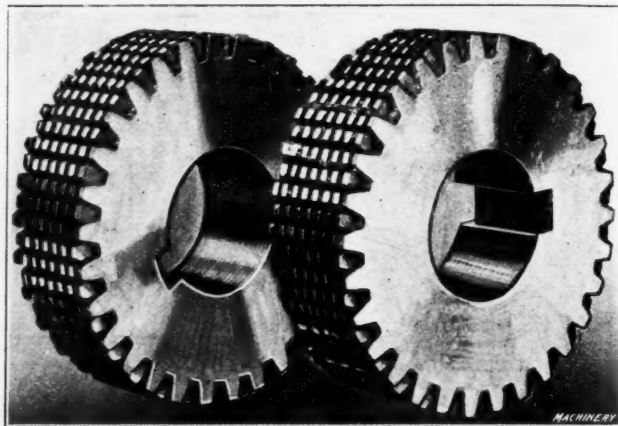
Laminated Gears formed of Toothed Disks riveted together
